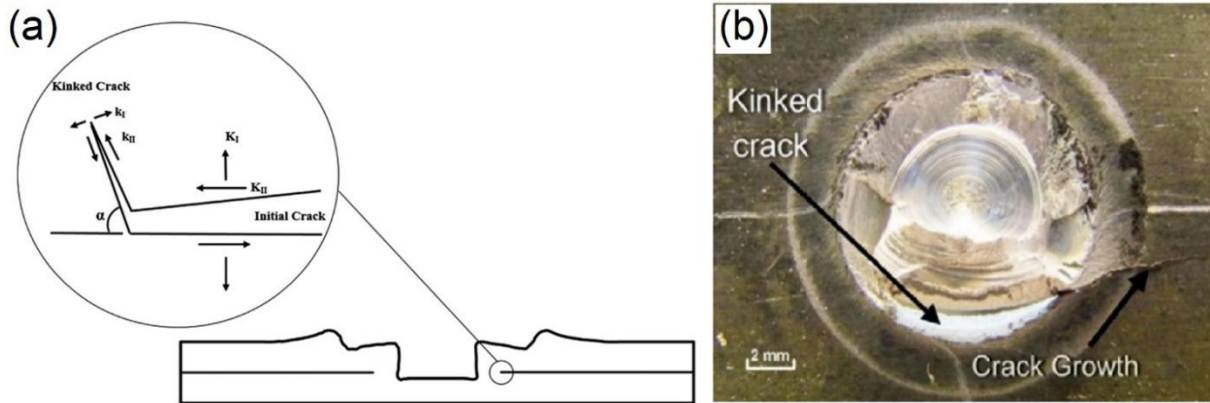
(a) Schematic view of the FSSW cross-section with a magnified view of initial crack, kinked crack and the global and local stress intensity factors (SIF) [142]; (b) macrograph of the crack growth in the sheet and the final fracture surface at the mid-load level [143]
